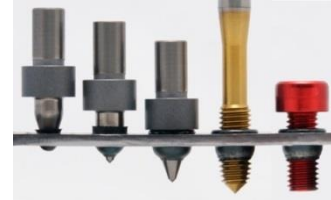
The process for threaded holes in only one sheet of metal (Form drilling©)
